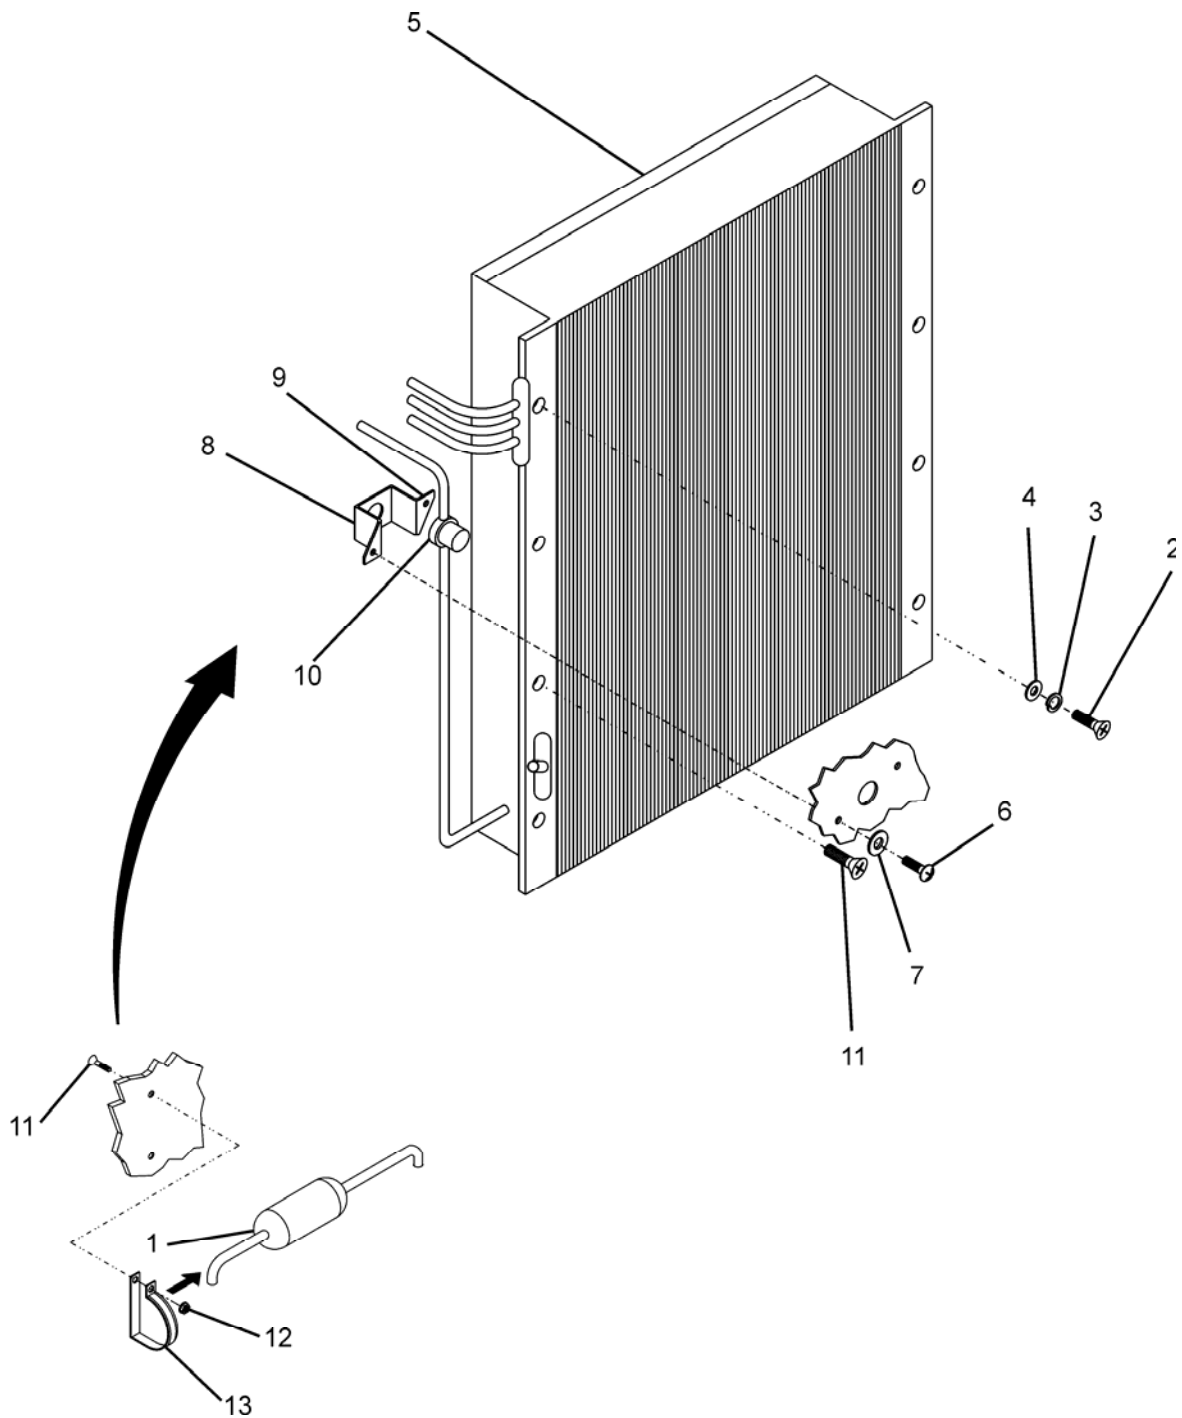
Condenser Coil, Liquid Sight Indicator and Receiver
